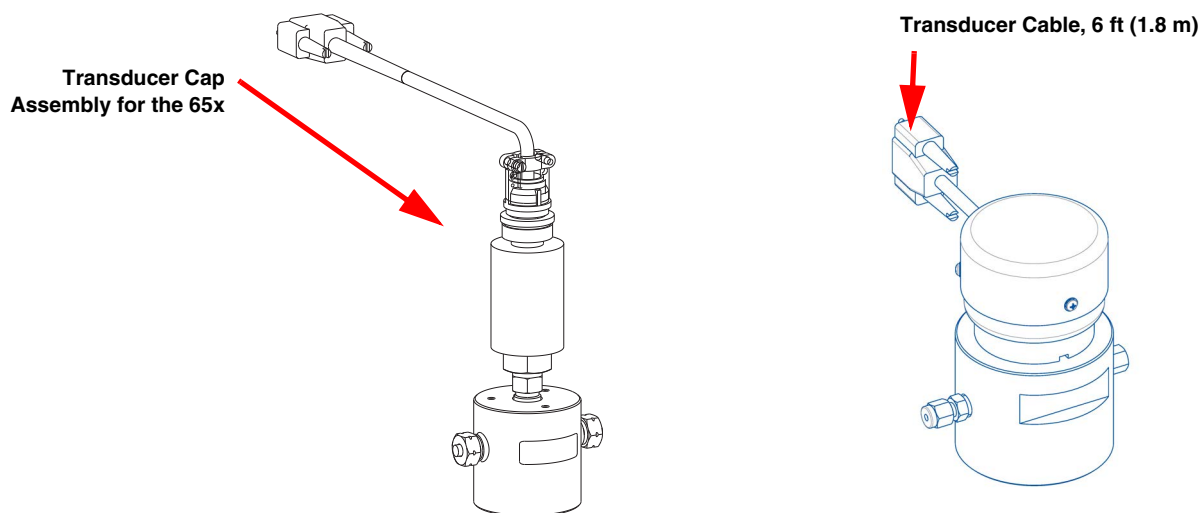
Syringe pump cylinder cap: Attach to pressure transducer connector on back of pump.
